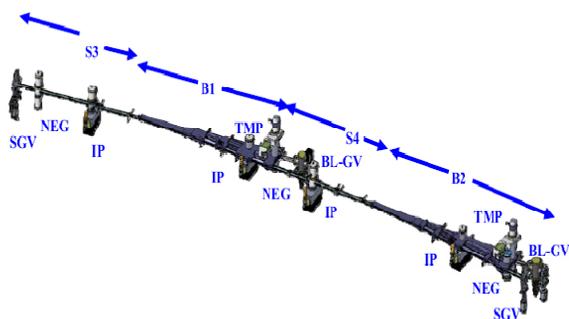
Assembly drawing of a vacuum system in one unit cell, excluding S1 and S2 chambers.
